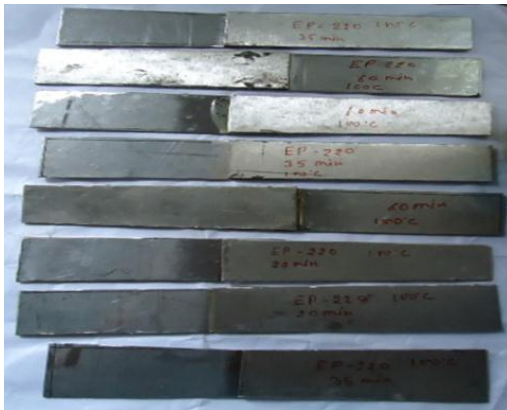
(a). Fabricated Samples by Spot Welding Machine
